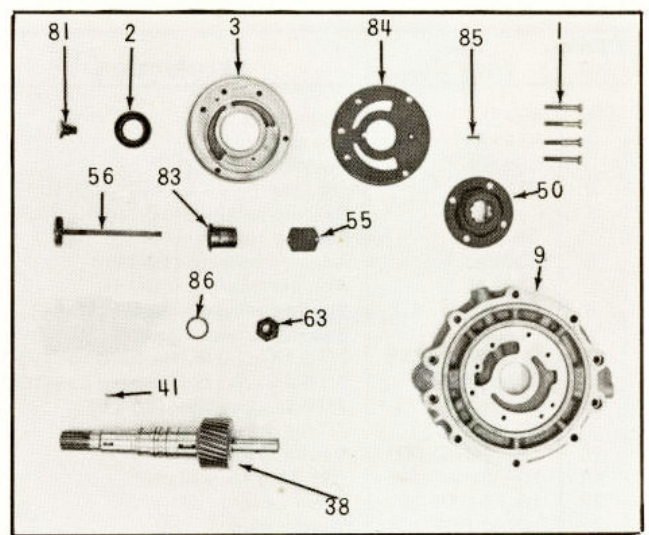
Parts Display for Forward & Reverse ASI-72 Transmission. Only Those Parts Different from the AS11-72C Assembly are Illustrated.
